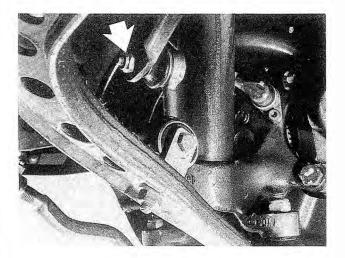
Nut (arrow) fastens stabilizer bar to stabilizer bar connecting link. Right (passenger) side shown.
